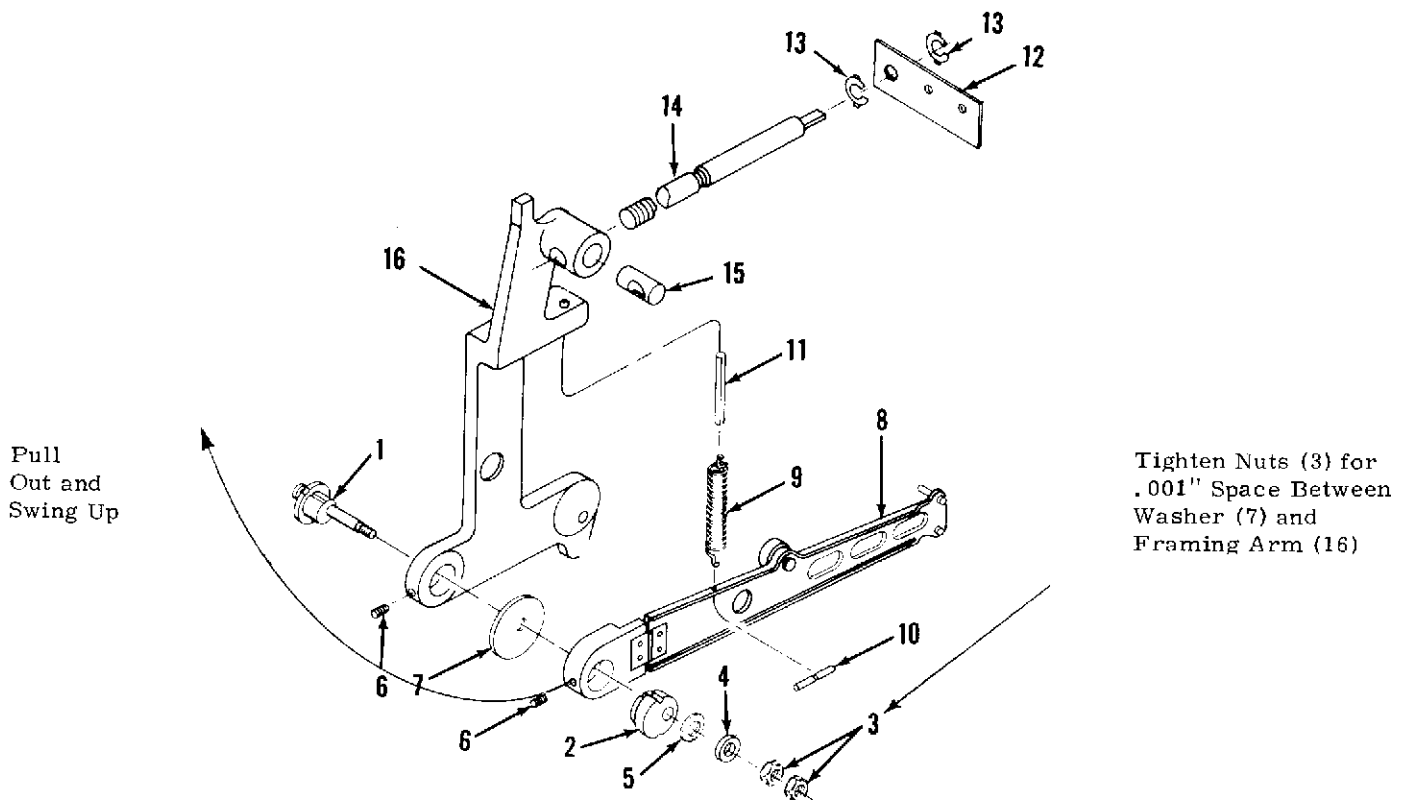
DISASSEMBLY AND REASSEMBLY
